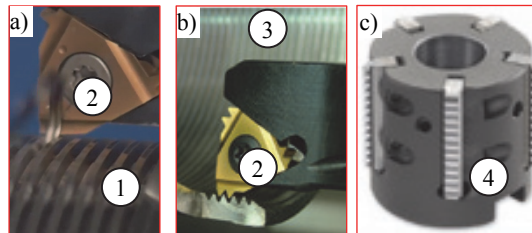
Turning of an external trapezoidal thread in four passages (a), turning the internal thread with the triangular outline in six passages by knife AVRC 40-4 with a plate Muilt 4IR8APIRD2M manufactured by VARGUS (b) and milling internal threads using a special type of head MiTM with plate with multi blade (c) (Vardex 2012): 1 – screw with trapezoidal thread, 2 – turning tool with a plate 3 – pipe with internal thread, 4 – thread milling head
